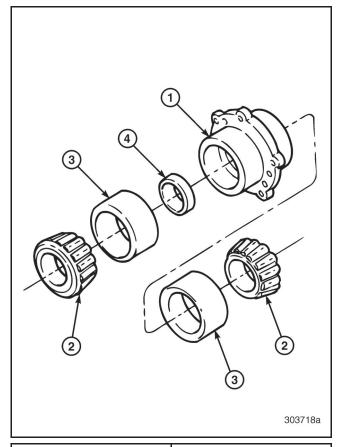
Front-Drive Shaft Bearing Retainer Locator
